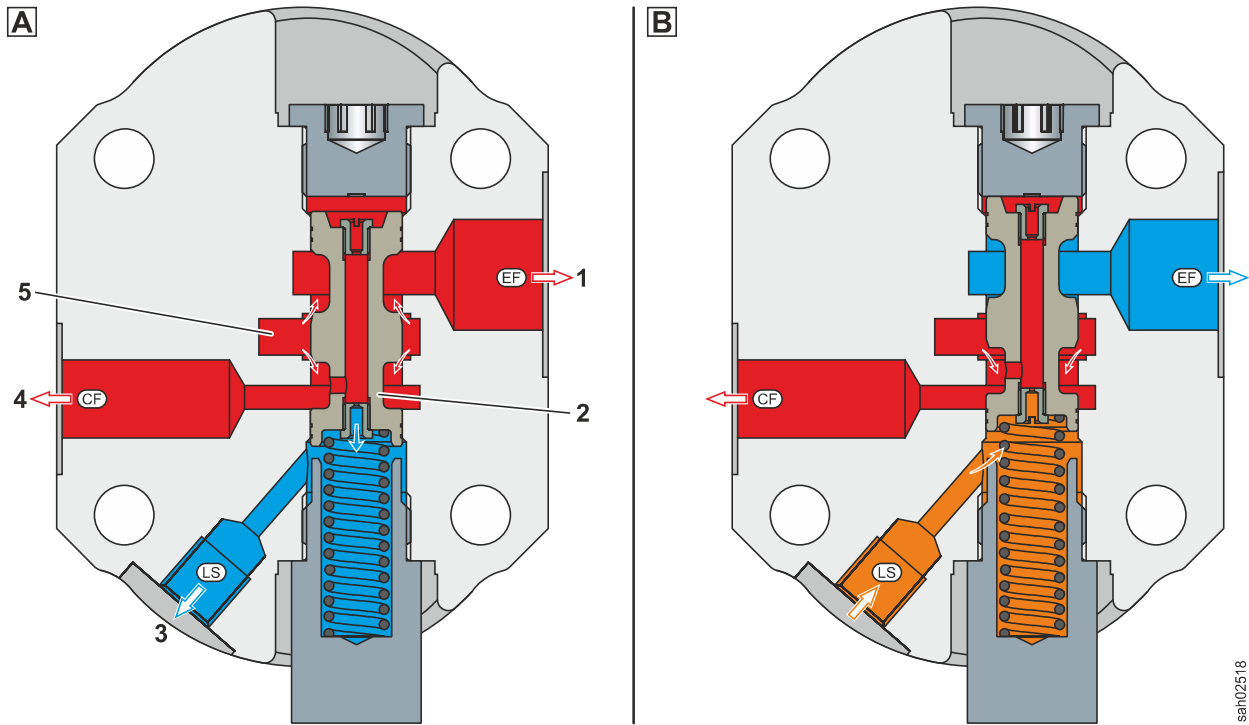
Priority valve with steering not actuated / priority valve with steering actuated
